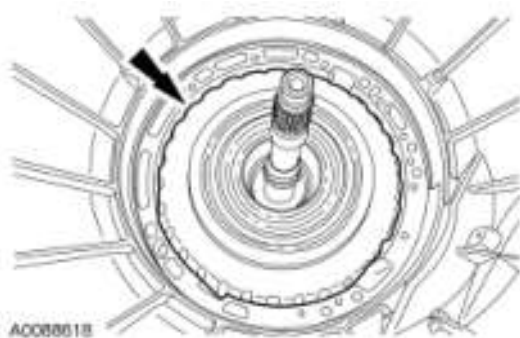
Locating Forward (Clutch A)/Overdrive (Clutch E) Clutch Assembly
